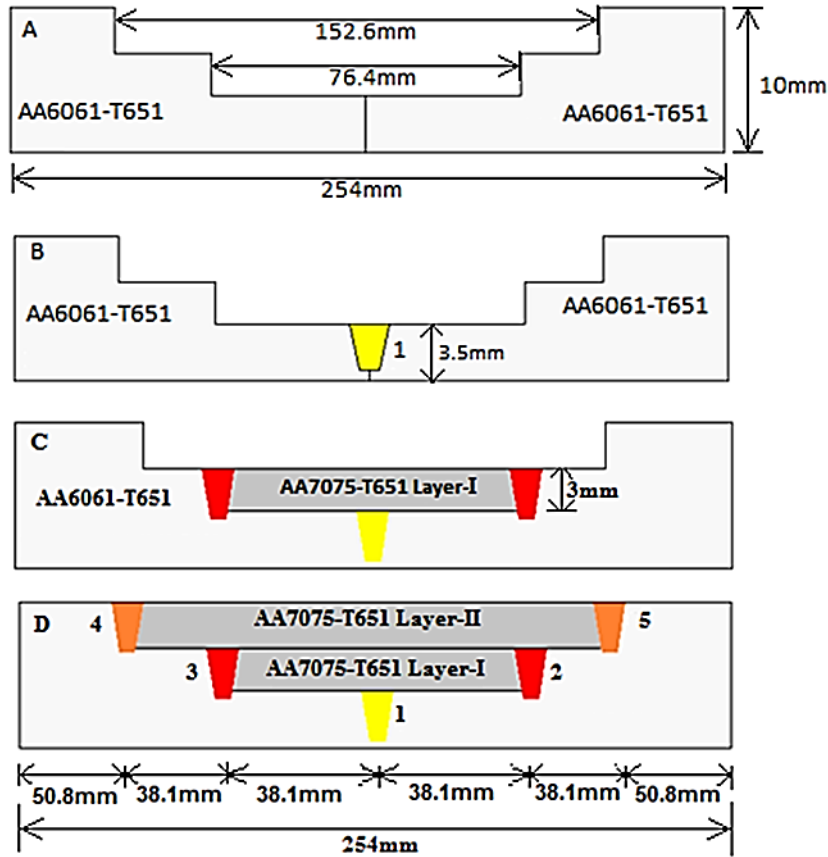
Schematic diagram of MM-FSW process, (A) Showing the cross-sectional view of pre-machined AA6061-T651 material for MM-FSW, (B) A butt weld configuration for the bottom layer, (C) FSW and insertion the first weld plate on top of the root weld, and (D) Situation of the second weld plate on top of the first welded plate and the finished weld structure followed by FSW
